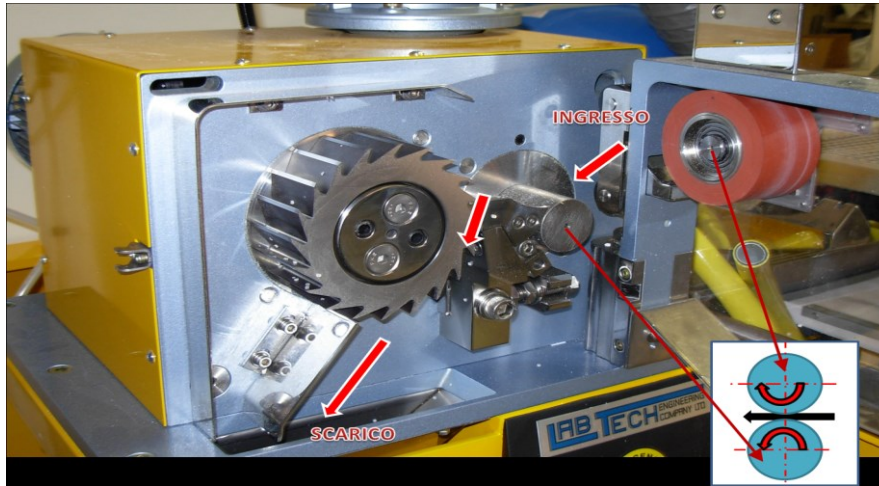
Scientific Laboratory Pelletizer type LZ-20, Labtech Engineering Co., Ltd.
